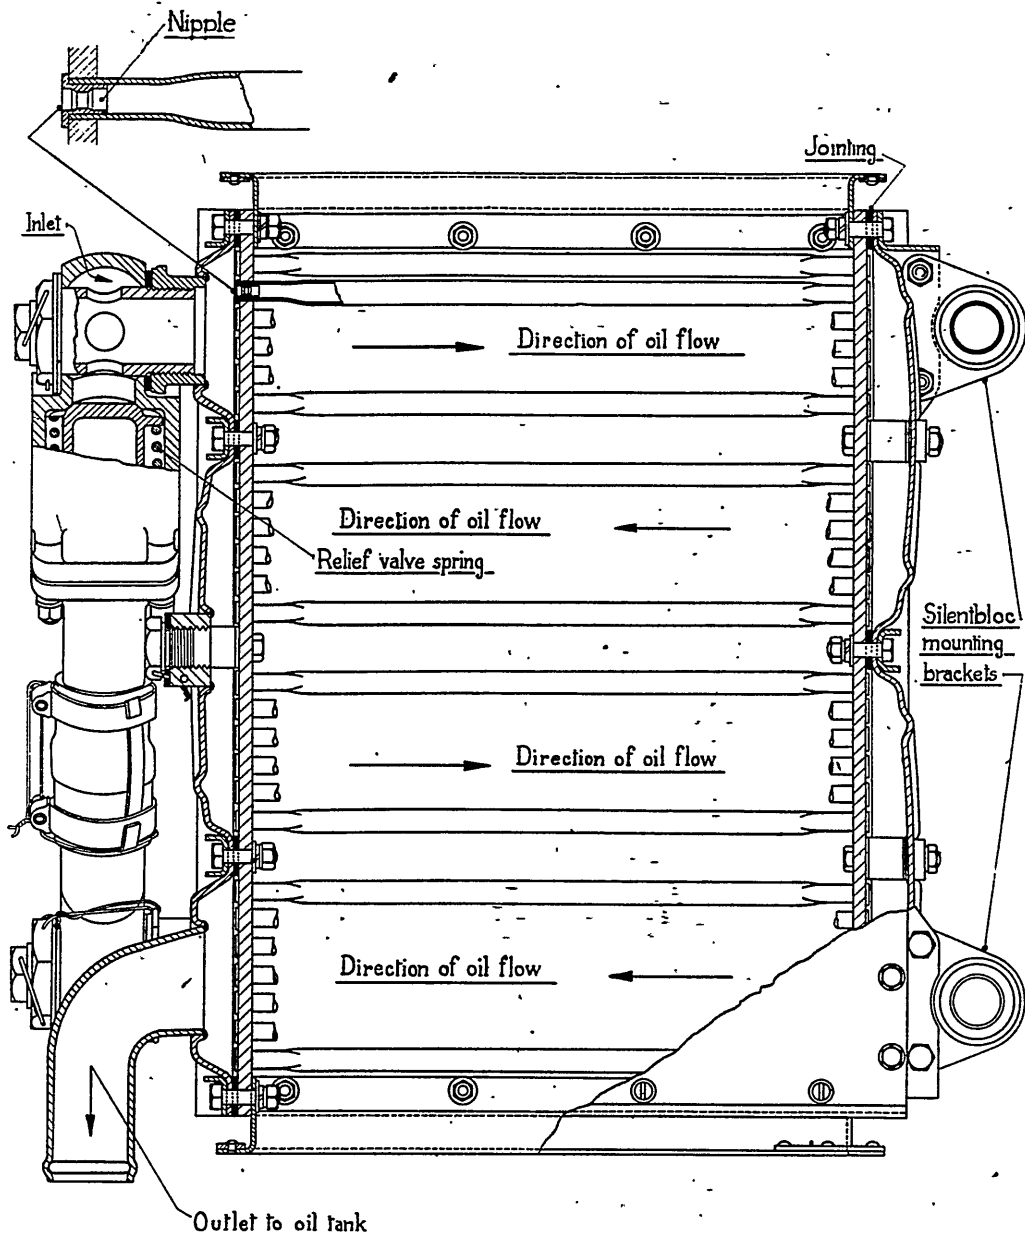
Oil cooler, Robertson Type R.H.5/29
